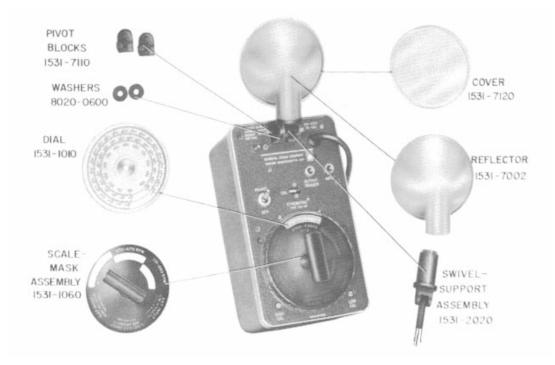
Location and part numbers of mechanical parts for the Type 1531-AB Strobotac[®].
